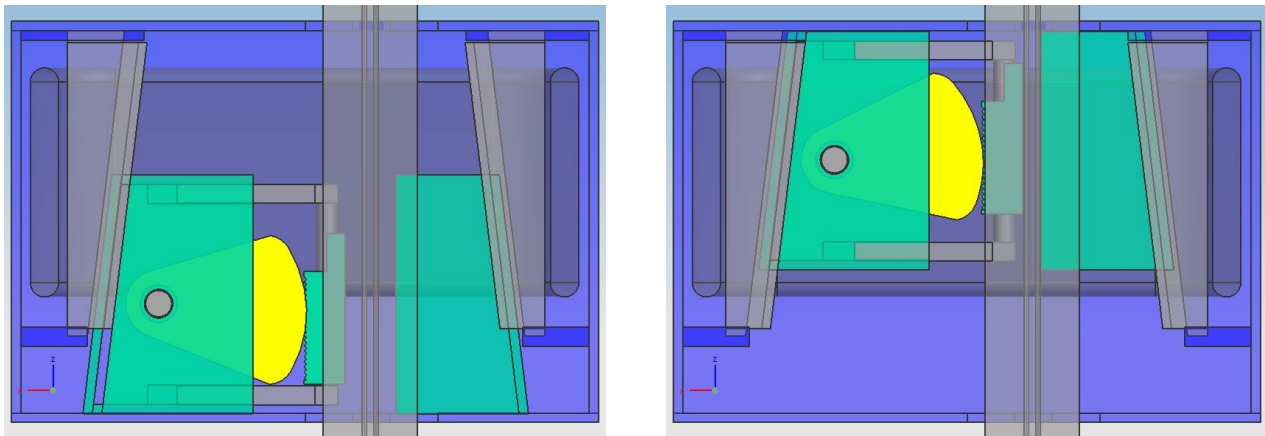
Rotating cam design in the disengaged position (left) and engaged position
